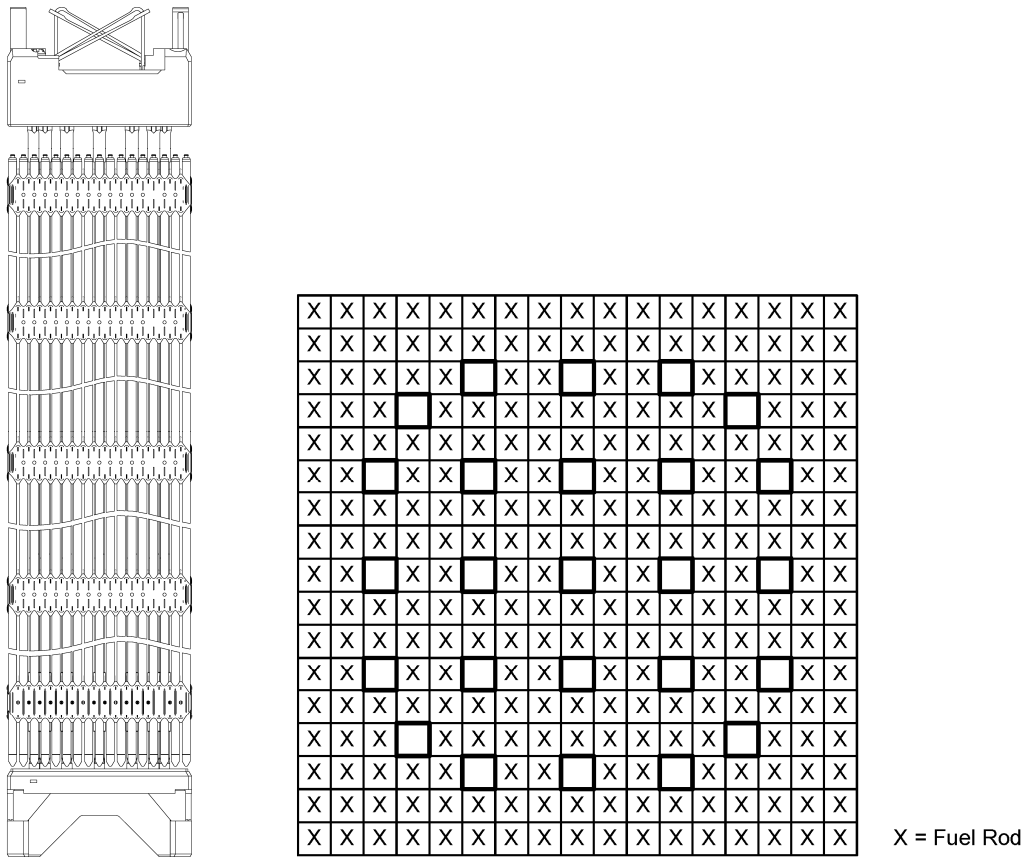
Example Fuel Assembly and 17x17 Lattice Design
